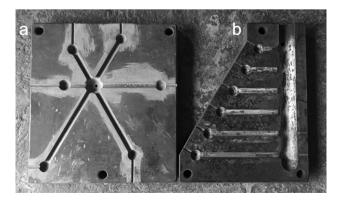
The half side of mold for the constrained rod casting (CRC) used in this research; (a) horizontal, (b) vertical mold.
